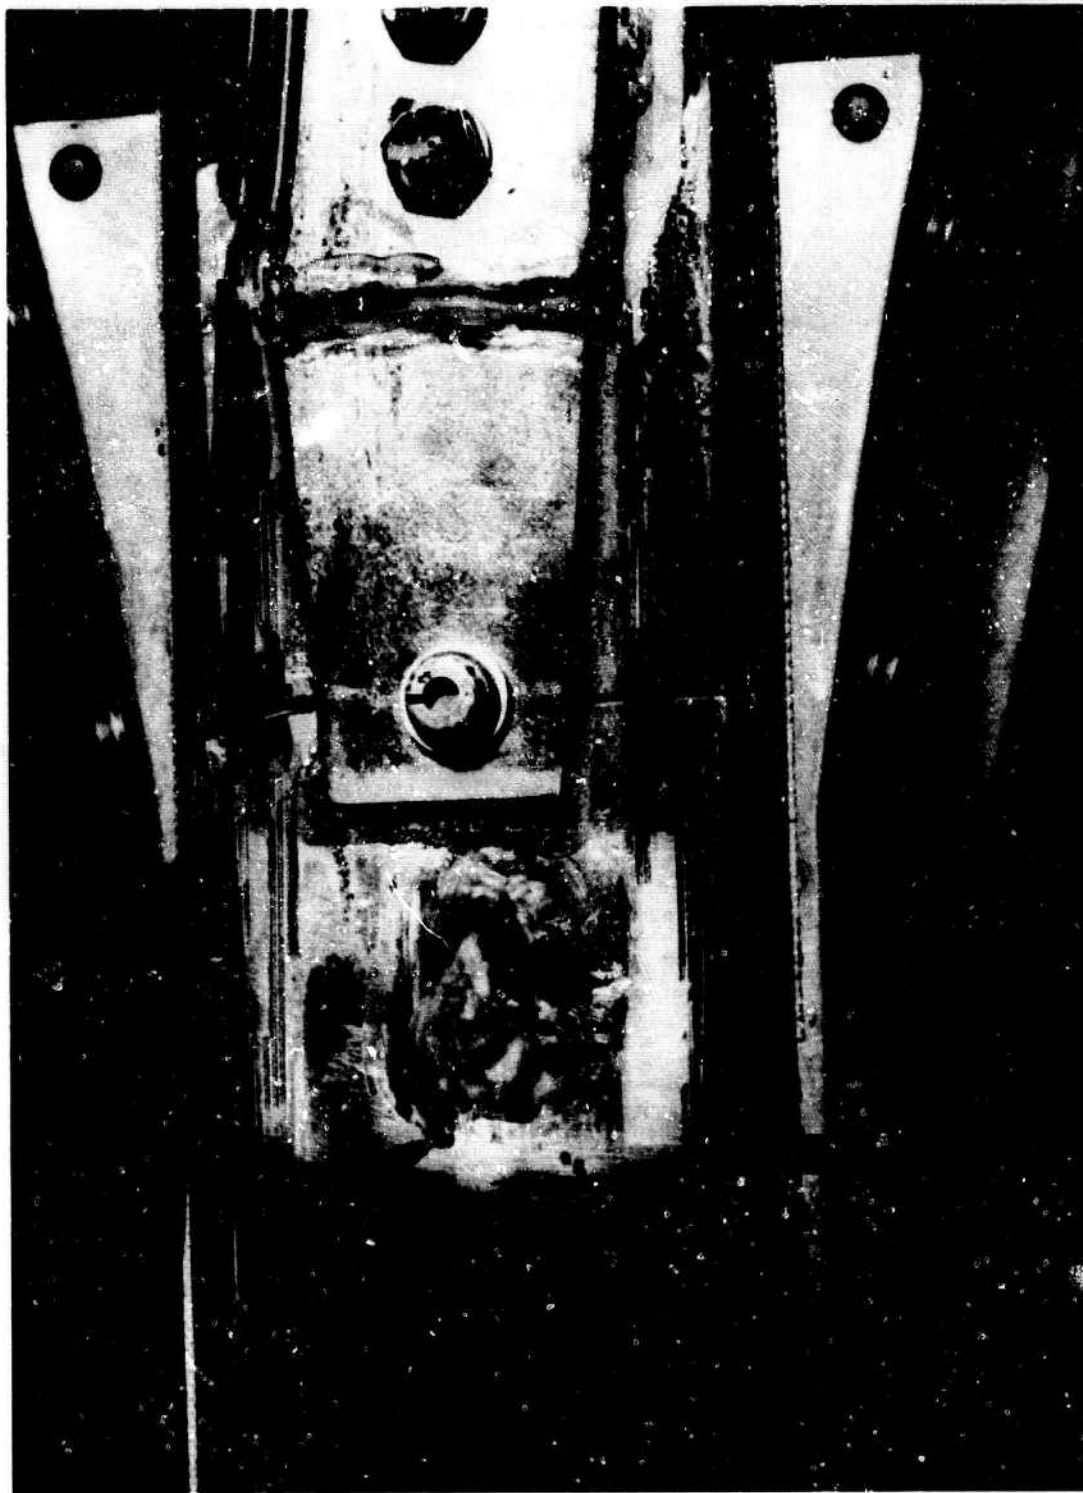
Blade Root-End Fatigue Test - Front Spar Fatigue Crack.
